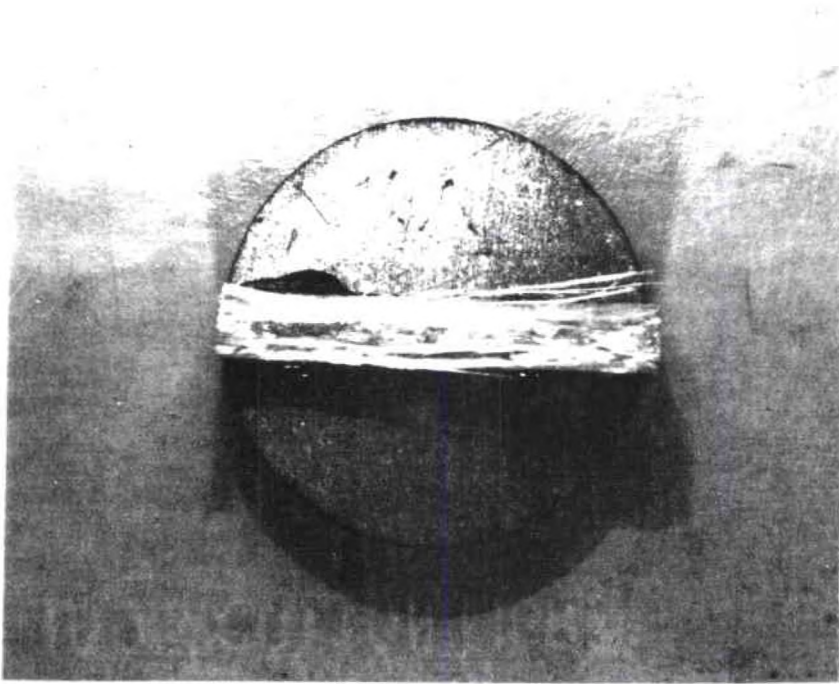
Flexural-fatigue fracture surface overview.
